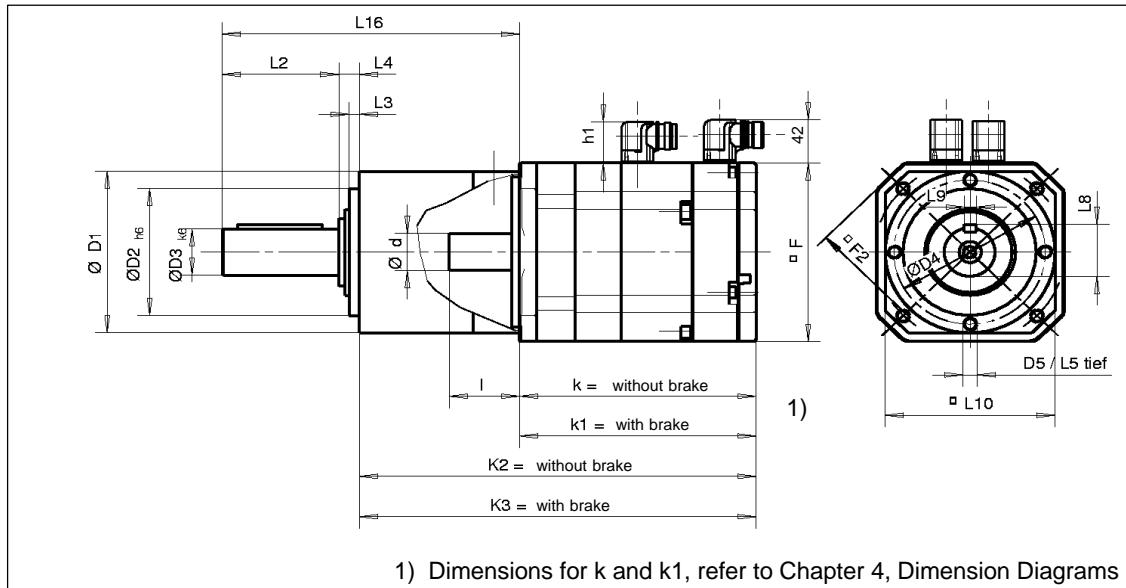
Dimensions 1FK7 CT and 1FK7 HD motor with planetary gearbox
